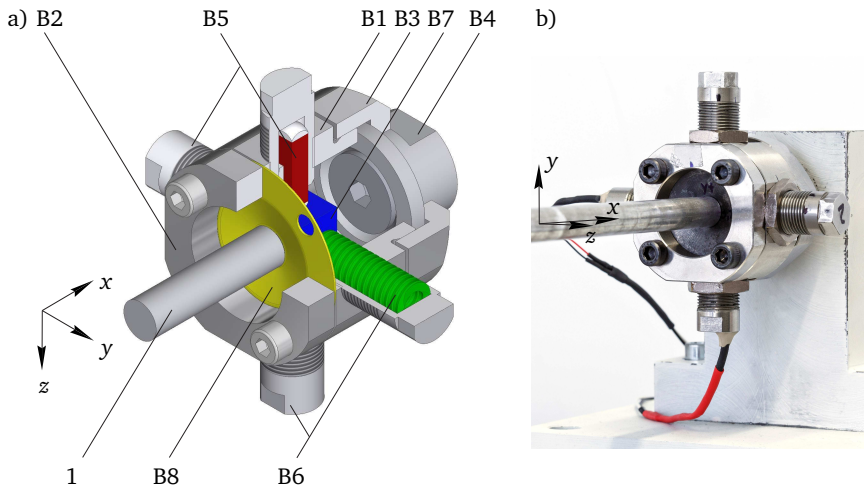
Piezo-elastic support B, a) CAD model cutaway view, b) realization
